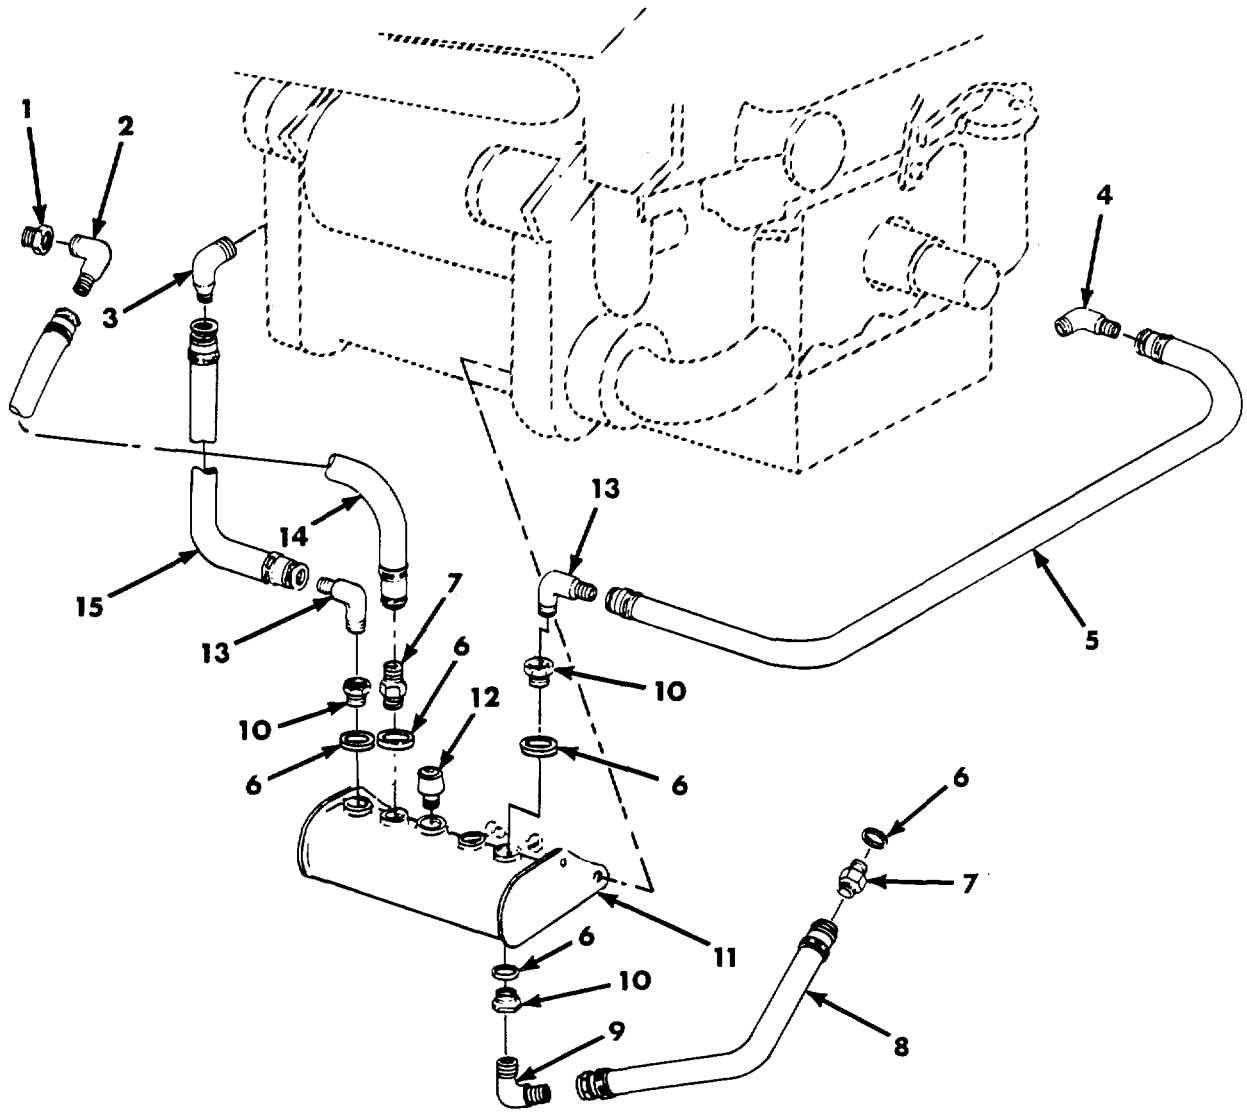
External Oil Lines and Fittings (Scavenger Reservoir),
